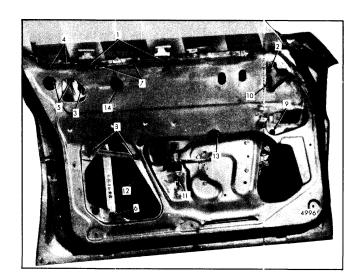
Front Door Window Removal and Adjustments - "A-29,35" Styles
